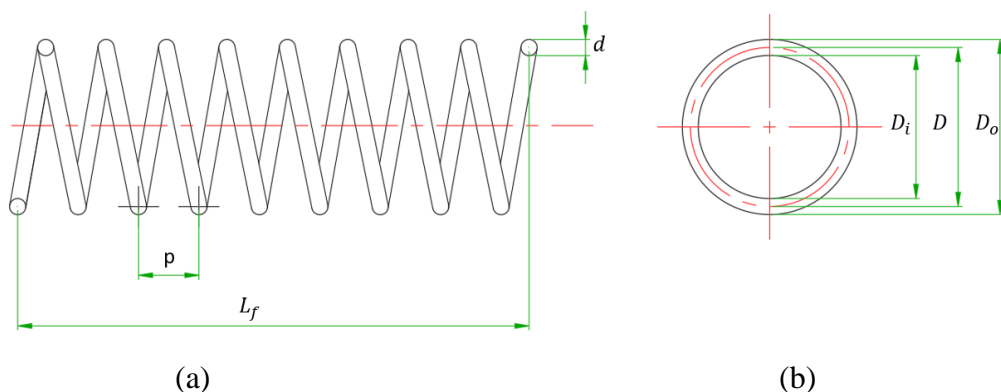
(a) front view and (b) top view of a helical compression spring
